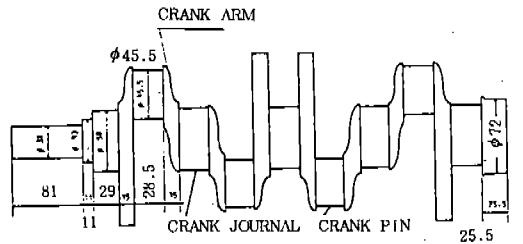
Schematic drawing of a crankshaft of a four cylinder engine
